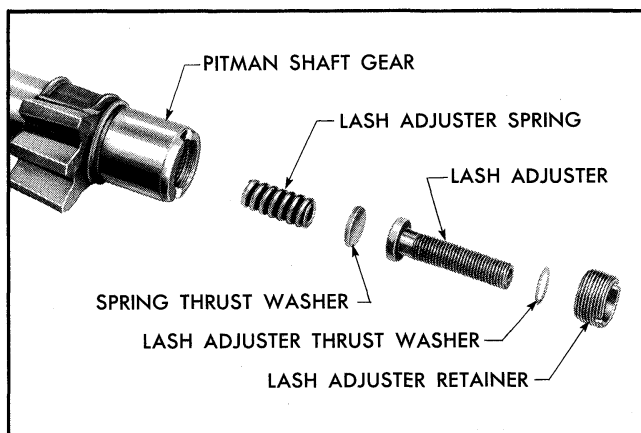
A-13 Parts in End of Pitman Shaft Gear
